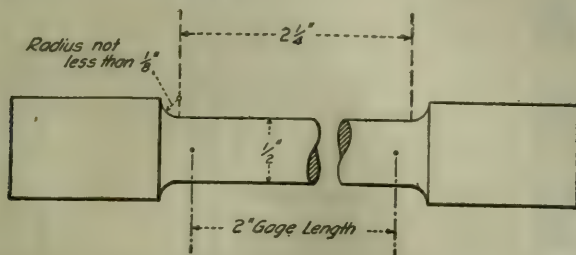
Form and dimensions of test specimen for tension tests of pins, rollers, and bars more than $1\frac{1}{2}$ inches thick.
